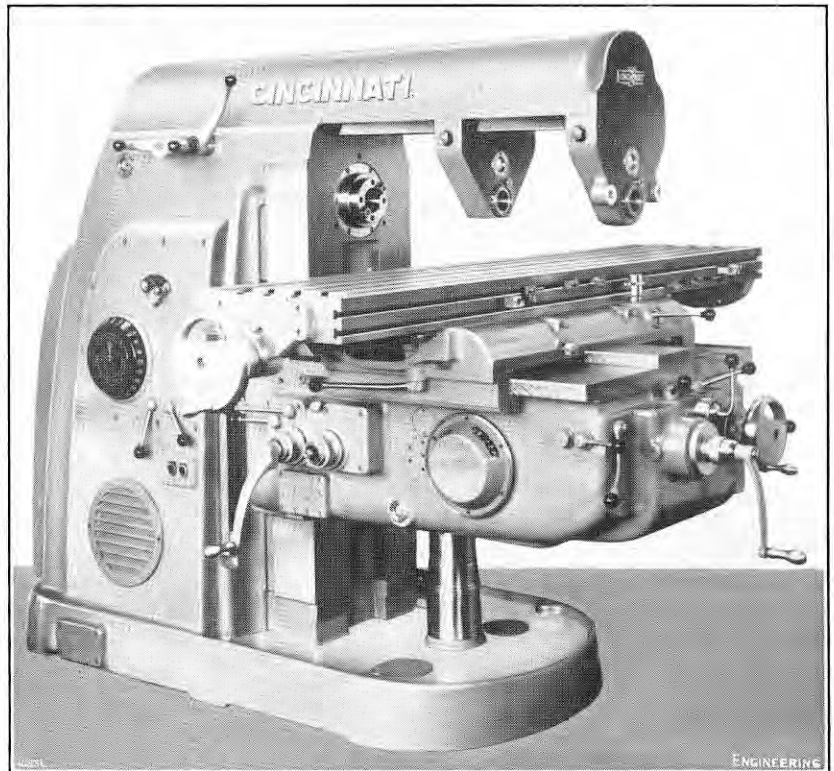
DUAL-POWER MILLING MACHINE; CINCINNATI MILLING MACHINES, LTD.
